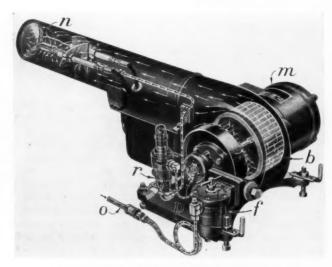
GUN TYPE OF VAPORIZING OIL BURNER
